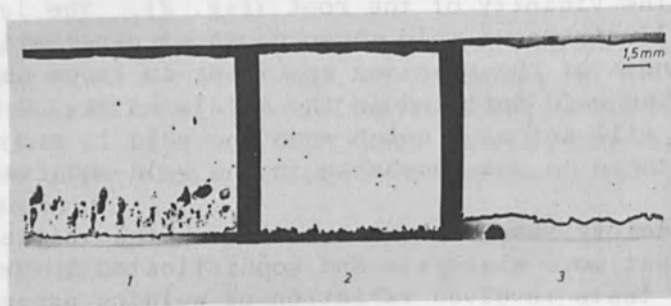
Longitudinal seam (cross section) in TT St 35 steel.
